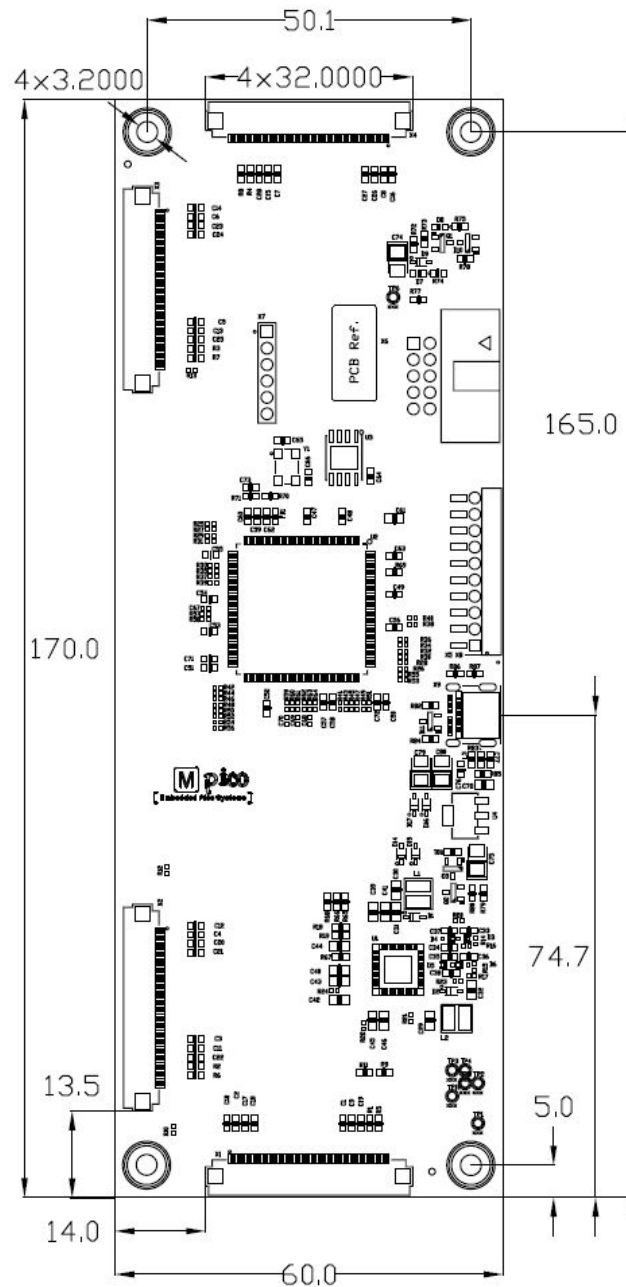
TCM2-E312-320 Outline (all dimensions in mm)
